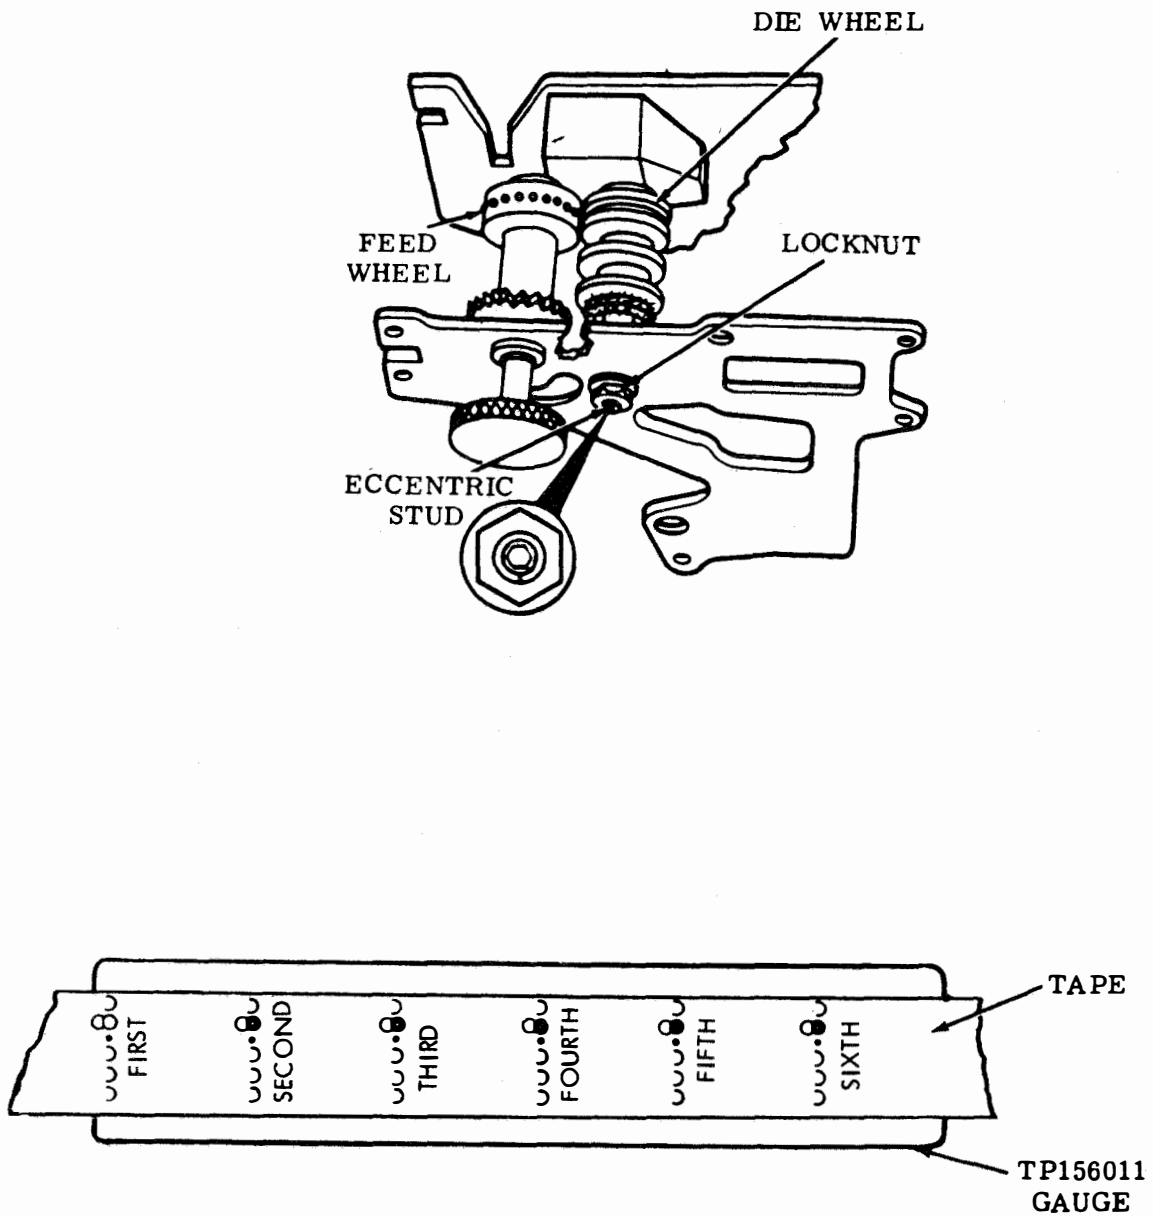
Reperforator Mounting and Ten Characters per Inch (Preliminary and Final) (For Chadless Tape), Front View
